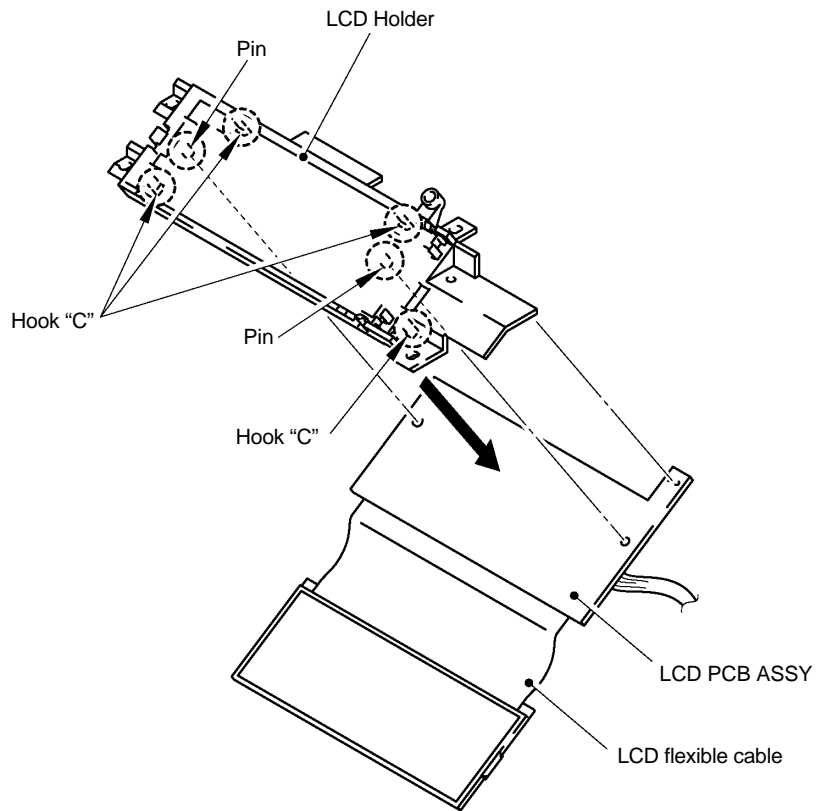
Reassembling the LCD Module Unit (1)
